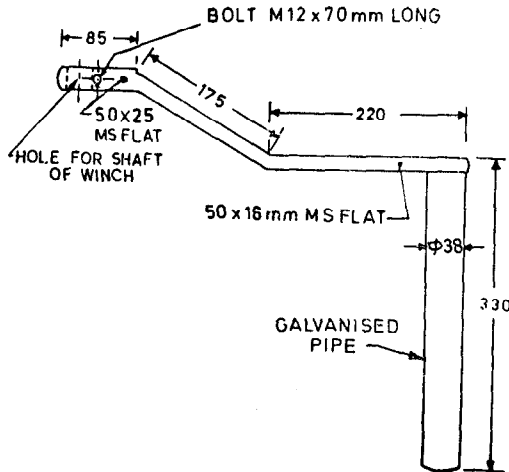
DETAILS OF HOISTING EQUIPMENTS TYPE B — *Contd
